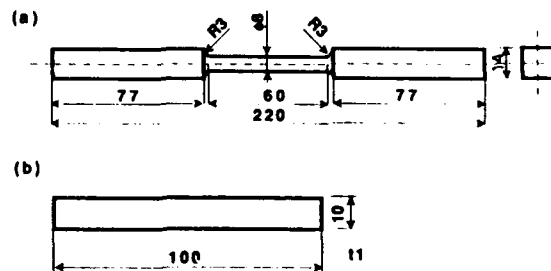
Dimensions of specimen: (a) Torsion pendulum method, (b) Cantilever-type method.
